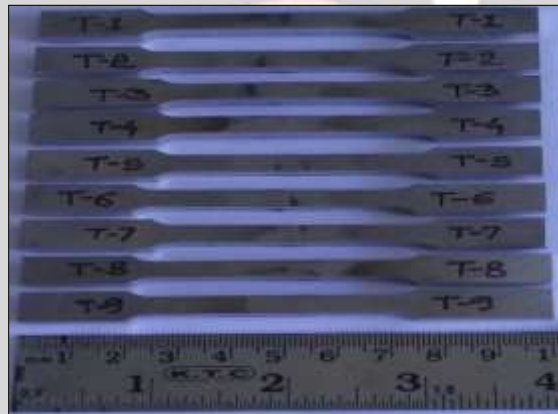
Tensile Test Sample for TIG Weld Joints
